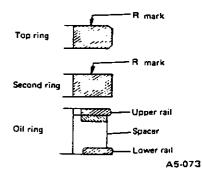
Cross section of piston rings (Riken Piston Ring)
